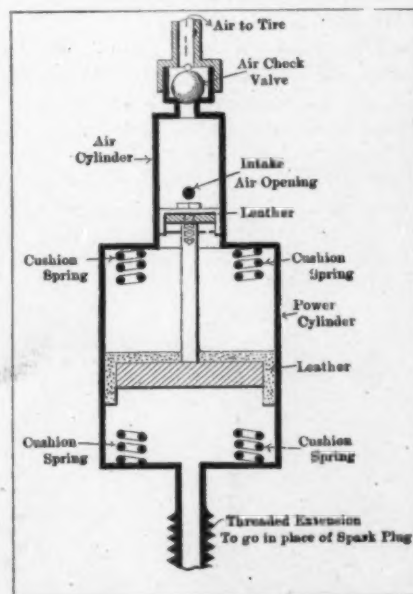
Cross-section of the pump, showing the connection between the power and air pistons and the buffer springs
